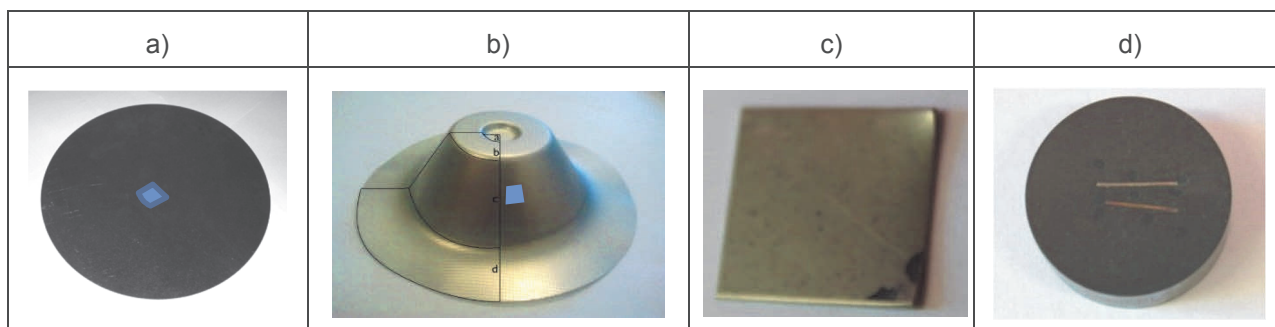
Inconel 625 alloy photographs: a) the charge for cone stamping - undeformed sample; b) cone drawpiece with signed line of cross-section cutting - deformed sample; c) cut sample; d) included sample for microstructure analysis
